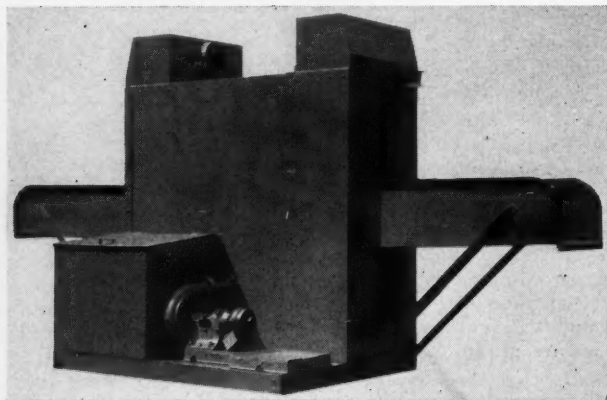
One-Stage Washing Machine for Washing Rear Axle Shafts in an Automotive Plant. Arranged for push-type tramrail. Machine is "built-up" to rail to eliminate a dip in the track before entering washer.
